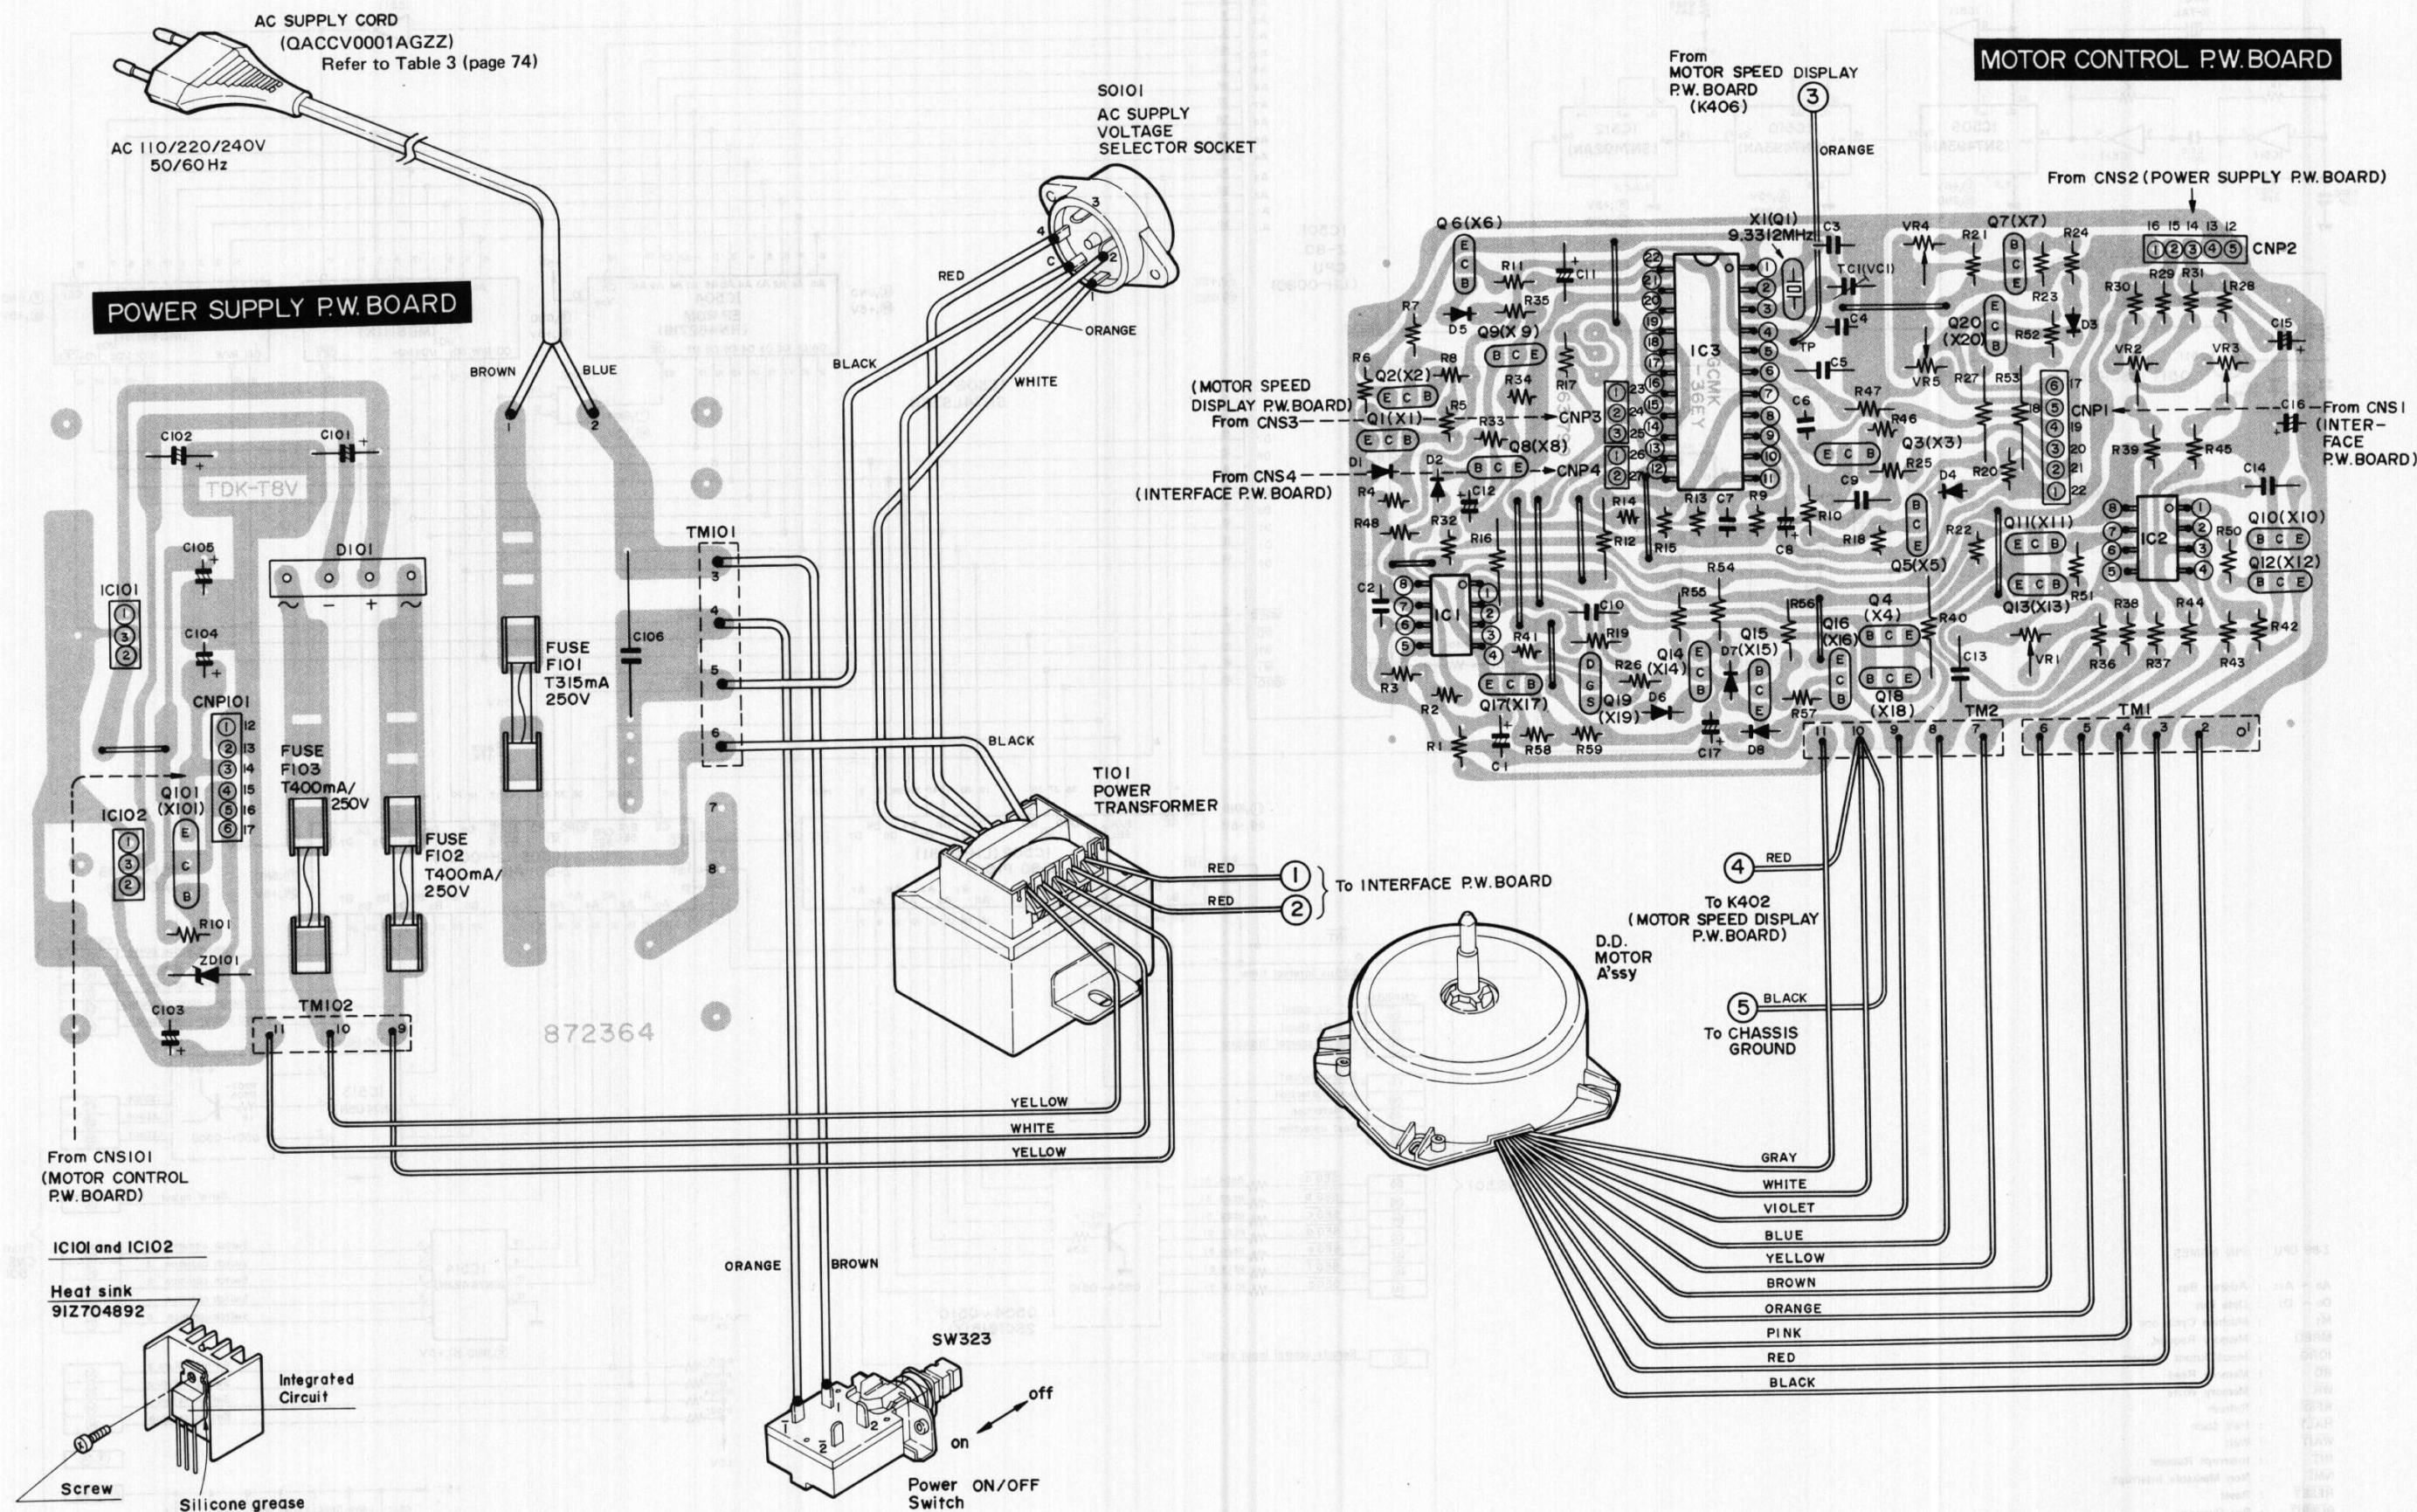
(OLD) WIRING SIDE OF MOTOR CONTROL P.W. BOARD AND POWER SUPPLY P.W. BOARD
